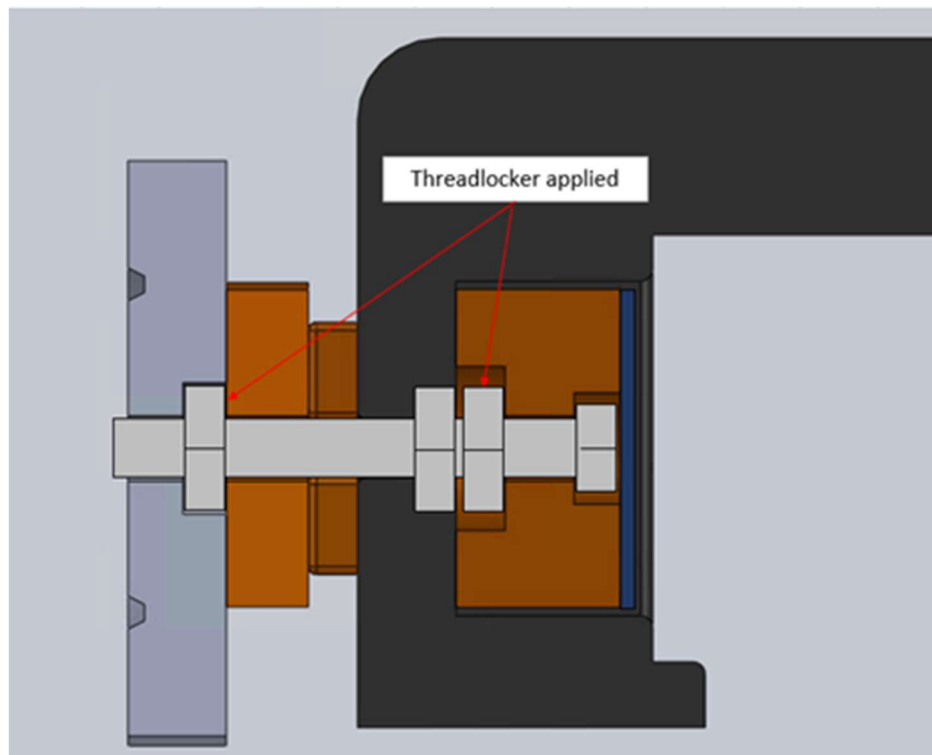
Figure W: Cross-sectional view of locking mechanism to hold Y mount to the frame
